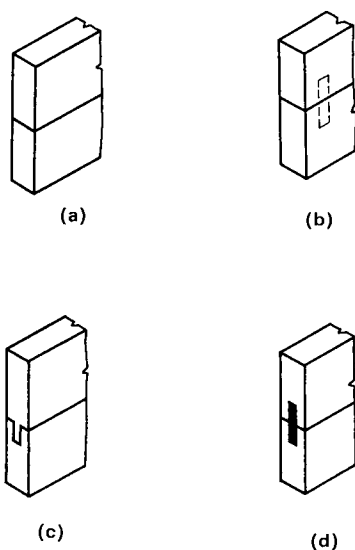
Joining two boards. (a) Butt joint. (b) Dowel joint.
